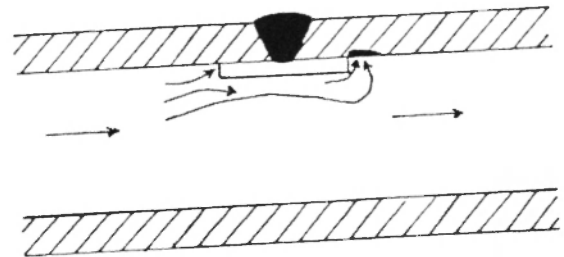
Weld backing plate for ring cause turbulence and crevice
